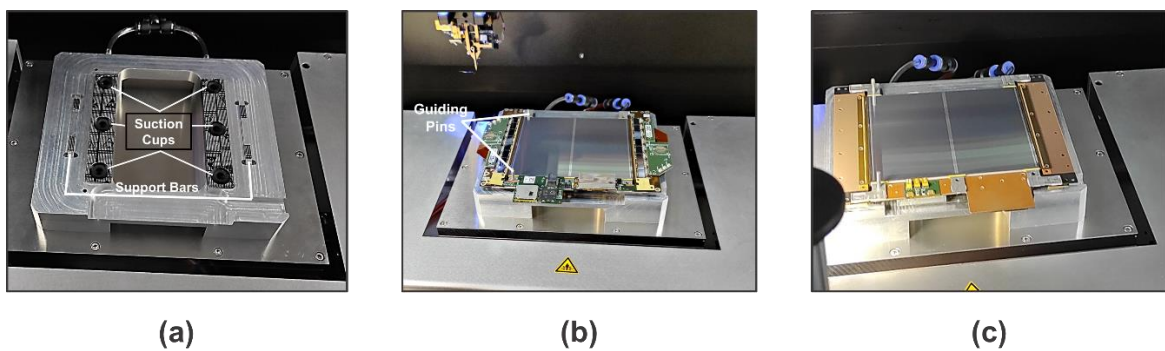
(a) Wire bonding Jig, displaying vacuum suction cups and support bars. (b) Top side of the module mounted on the wire-bond jig for bonding. (c) Bottom side of the module mounted on the wire-bond jig for bonding.
